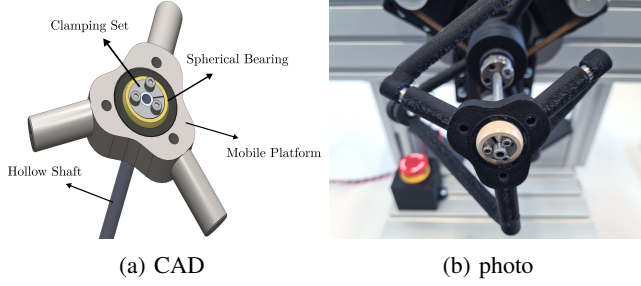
Design of the mobile platform with its components. i.e. hollow shaft, spherical bearing, clamping set.
